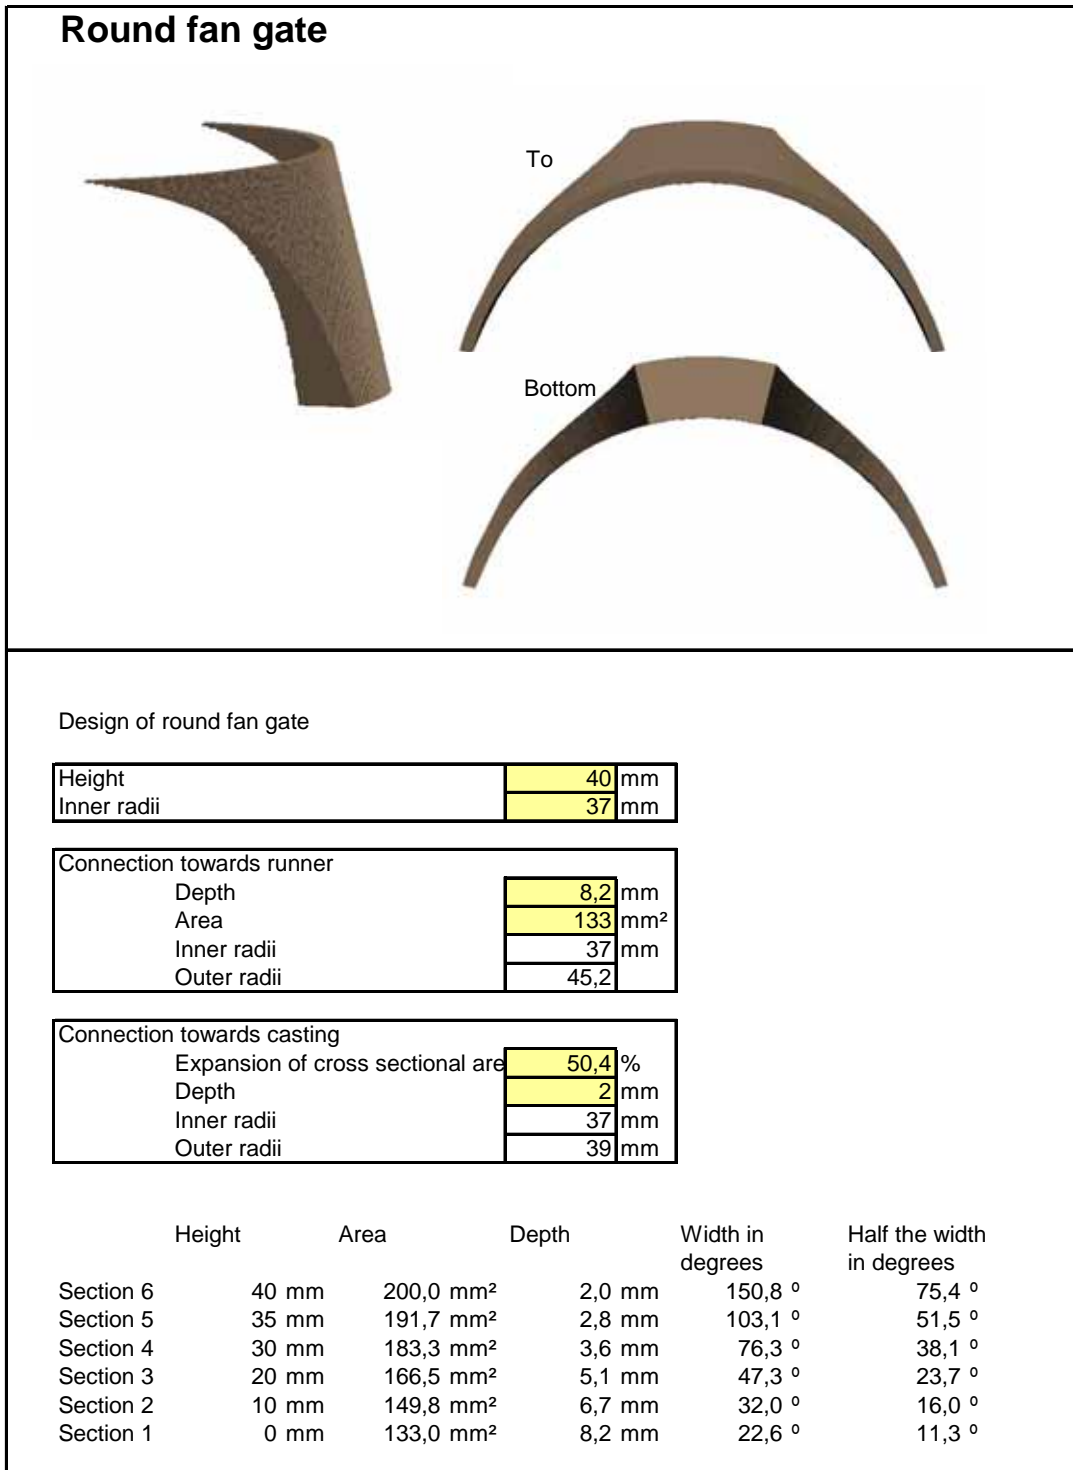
Sheet 3 – Fan gates. This part of the sheet is used for designing a round fan gate. This type of fan gate can be useful for filling of a cylinder shaped casting.
